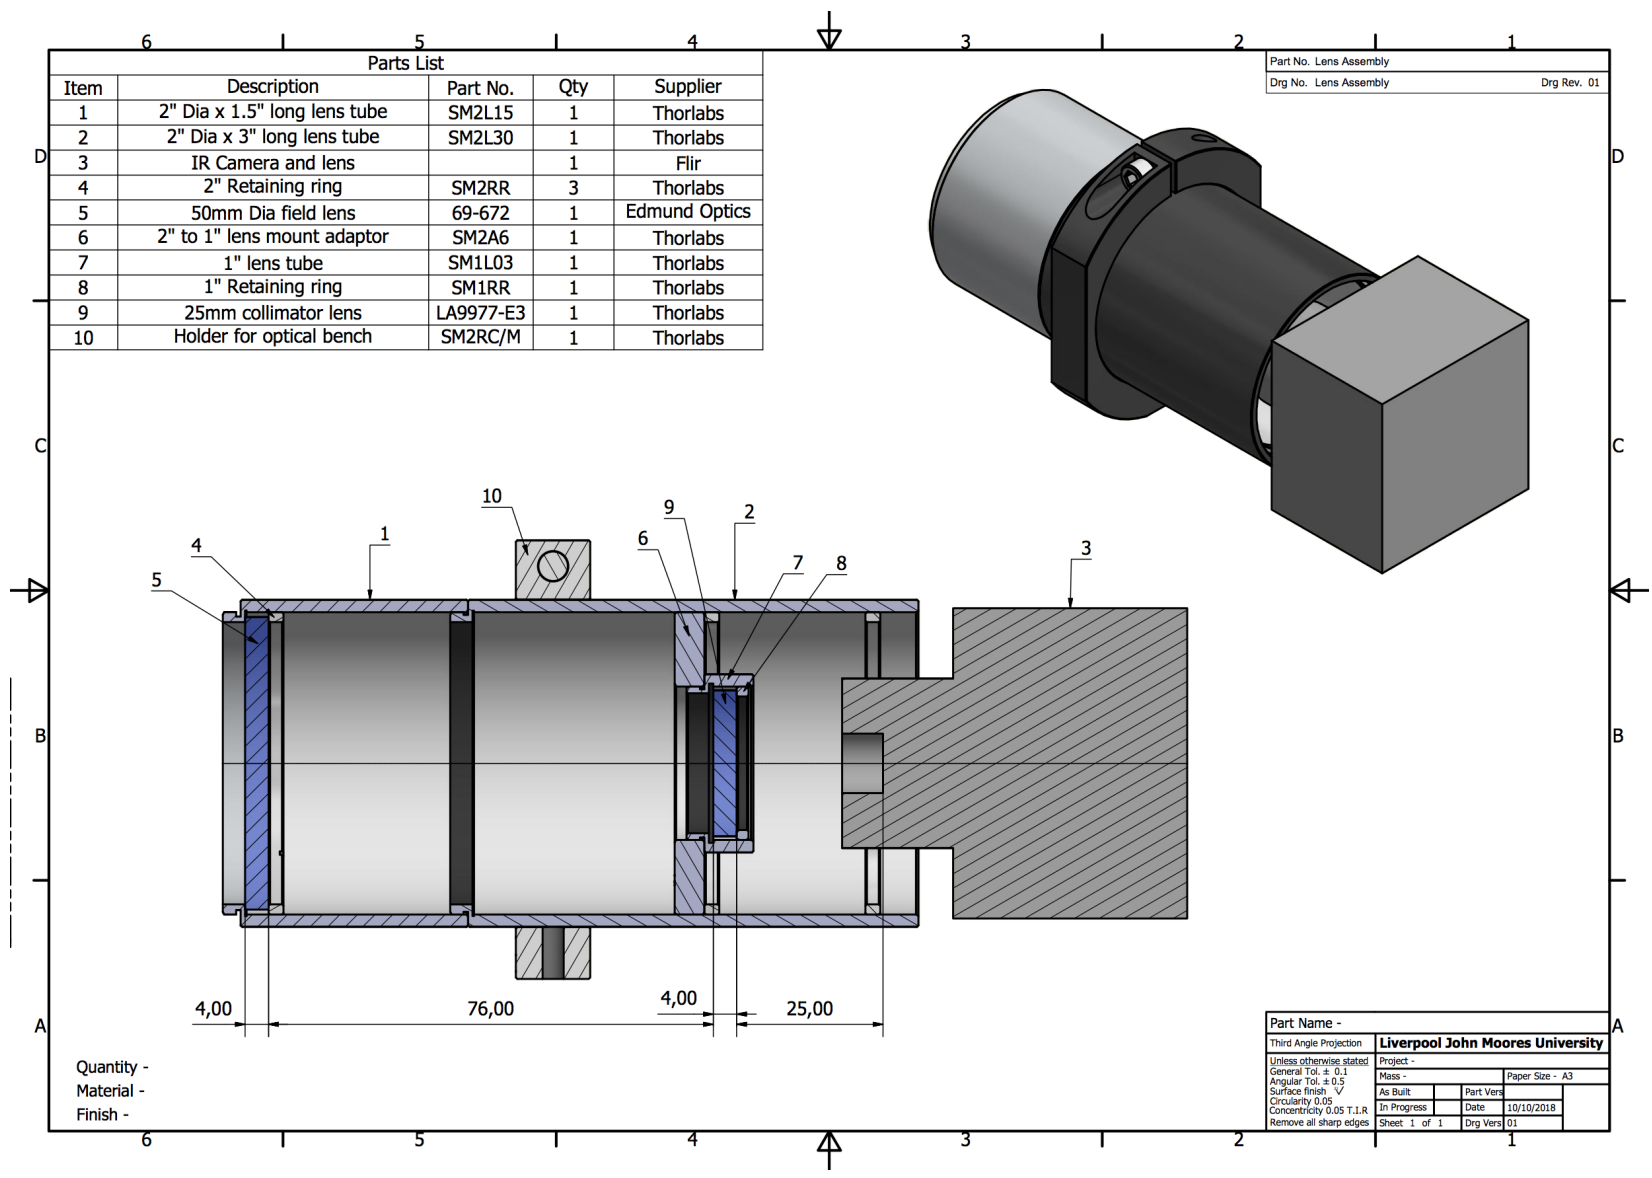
CAD model of the instrument assembly, with all parts identified and listed against their respective supplier and part number. All measurements are in mm. Image acknowledgement: S.Bates, Engineering Manager for the LT.
